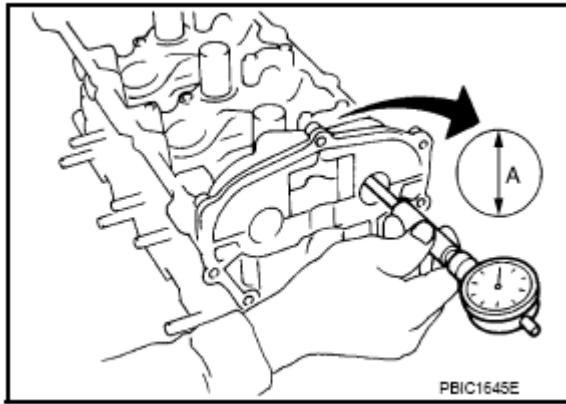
Measuring Inner Diameter Of Camshaft Bracket Using Bore Gauge
